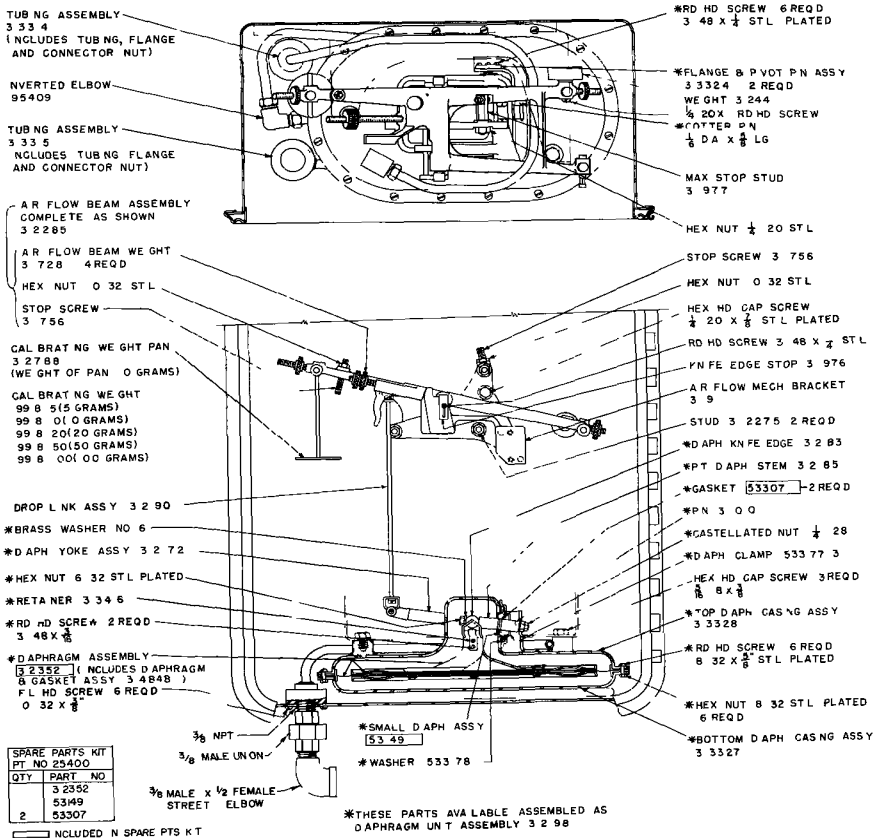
Parts Drawing M61-15, Type CE Diaphragm and Air Flow Beam Assembly
